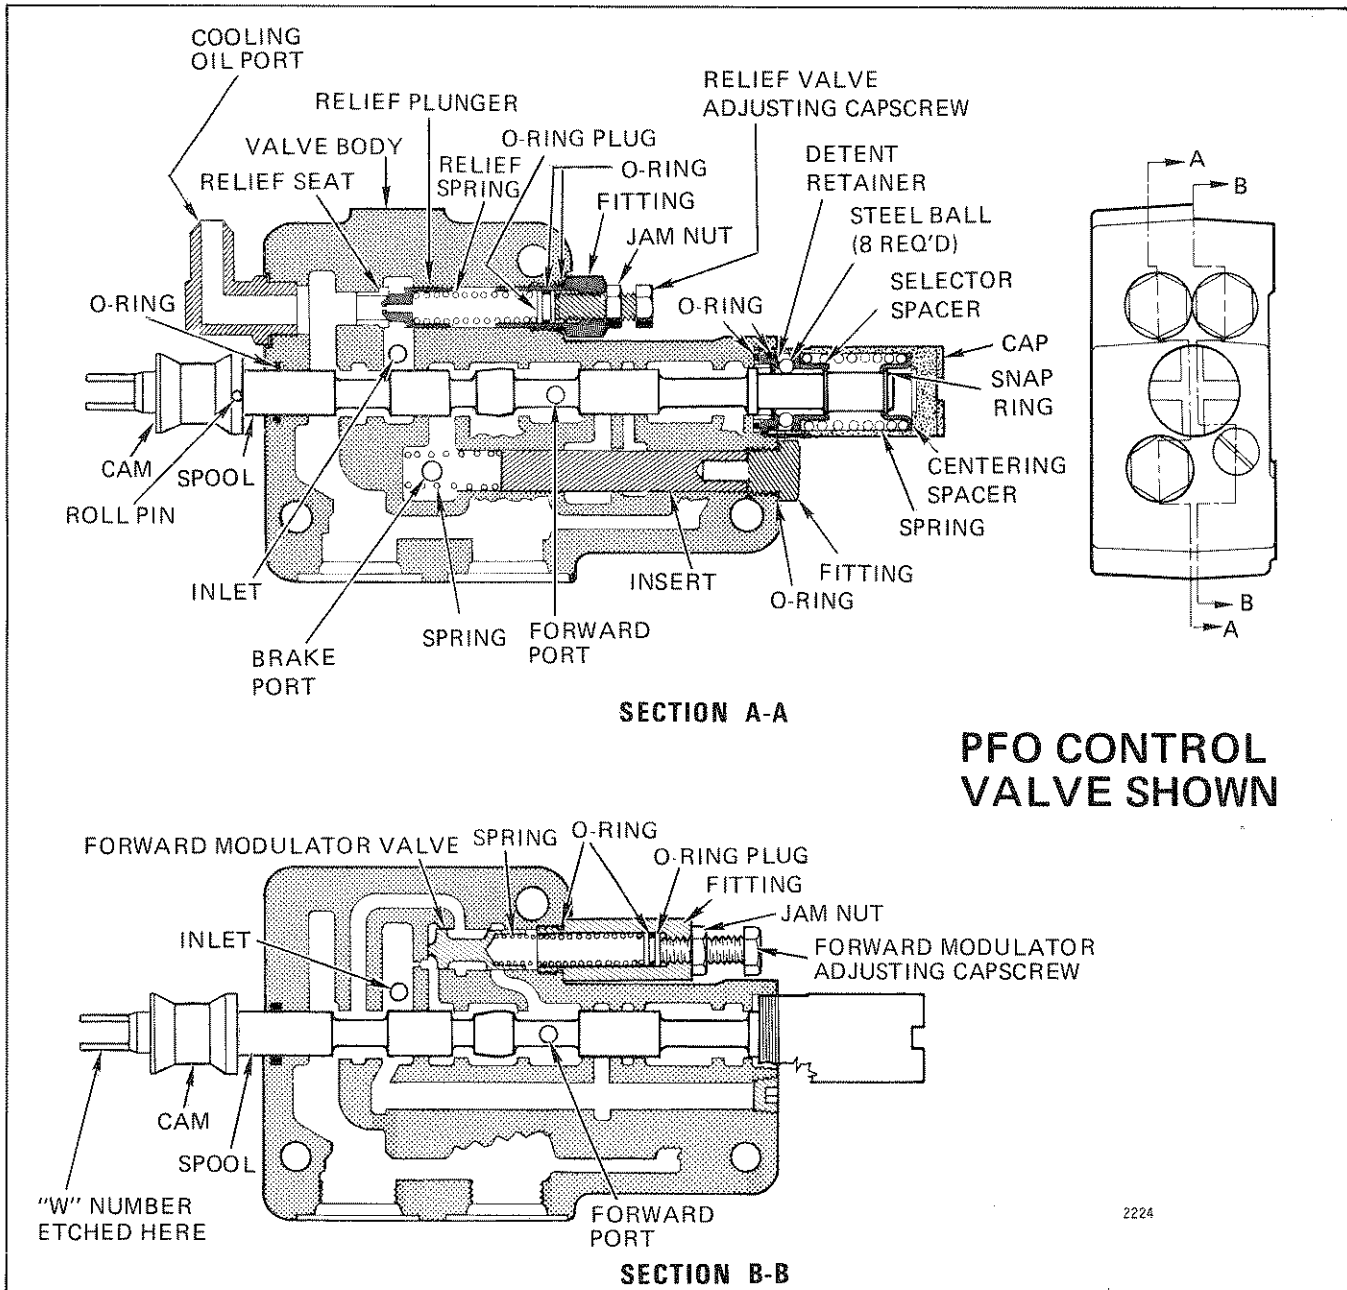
CONTROL VALVE REPAIR (Sheet 3 of 3)
